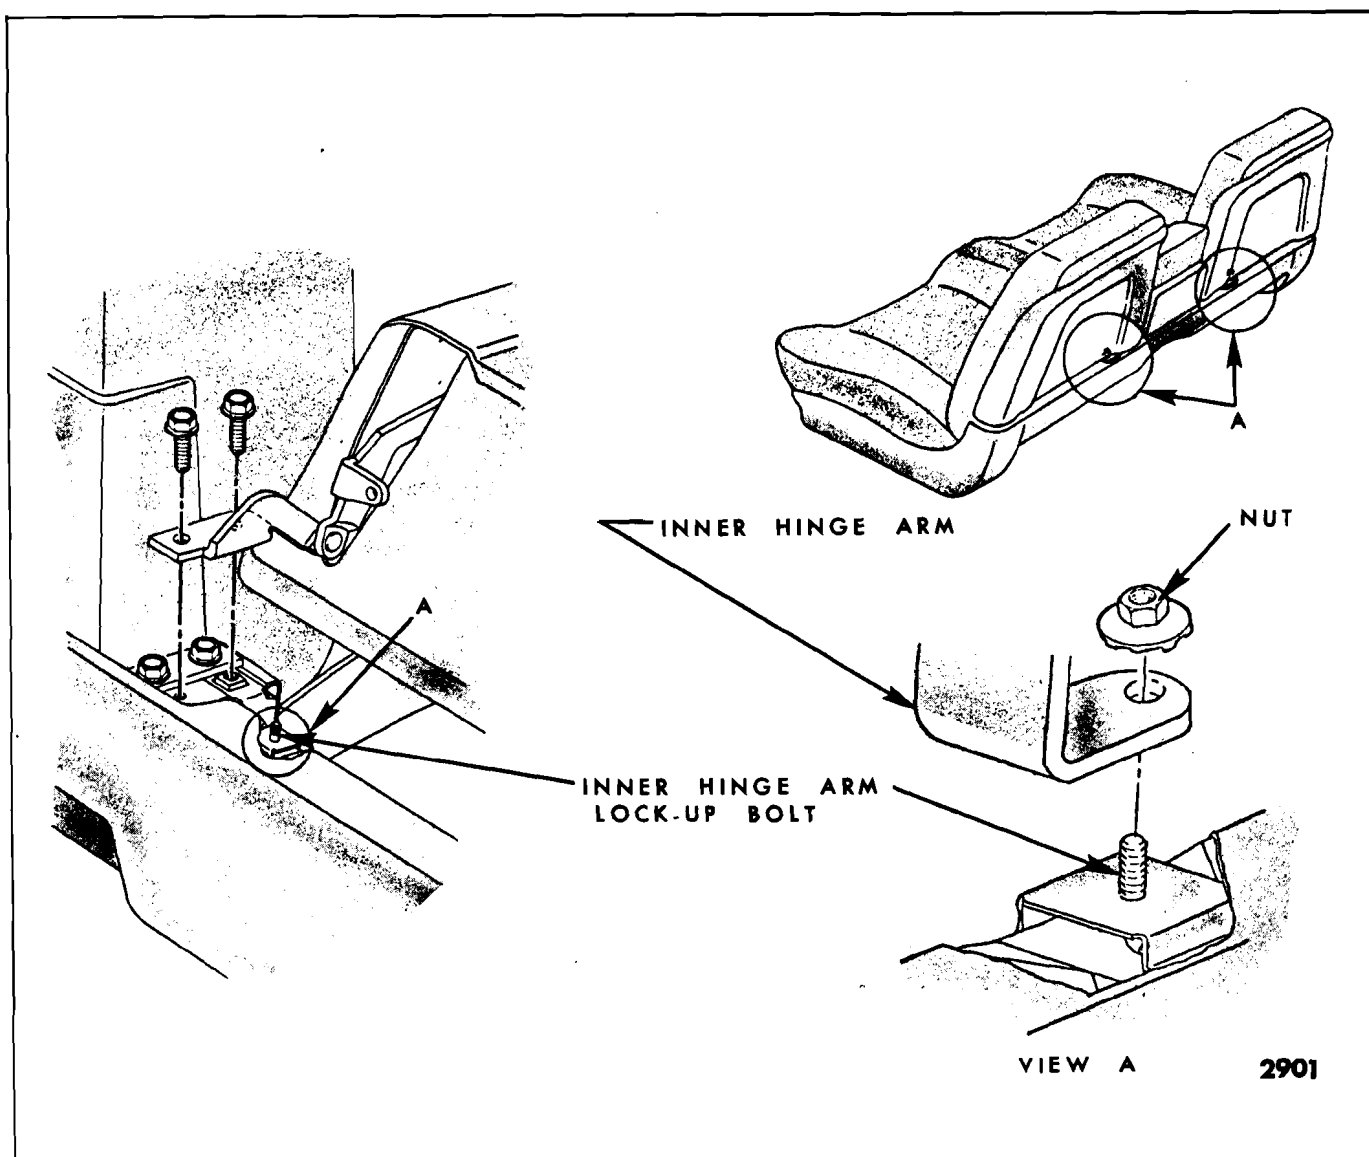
Strato Front Seat Back Assembly (Right or Left) Full Width Seat - 16639 Styles
